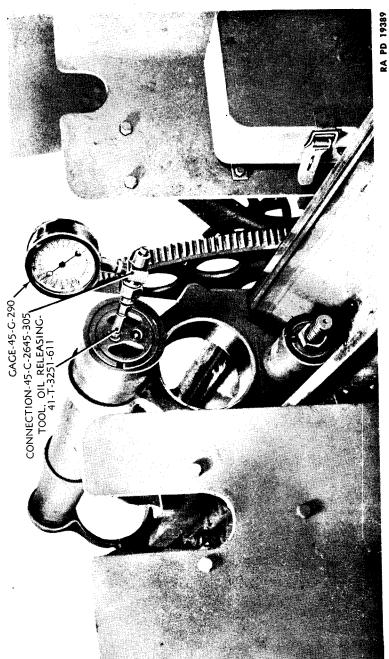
Measuring Nitrogen Pressure With Howitzer Tube Removed
